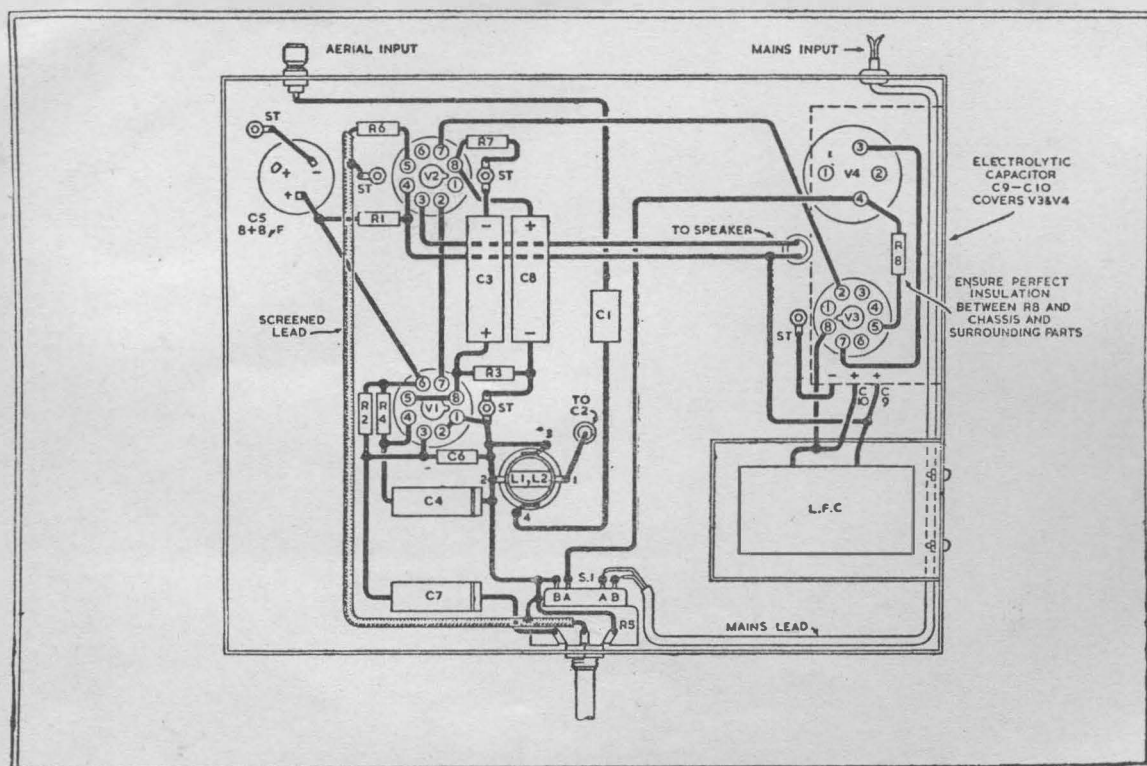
Under chassis layout and practical wiring of Fig. 18
